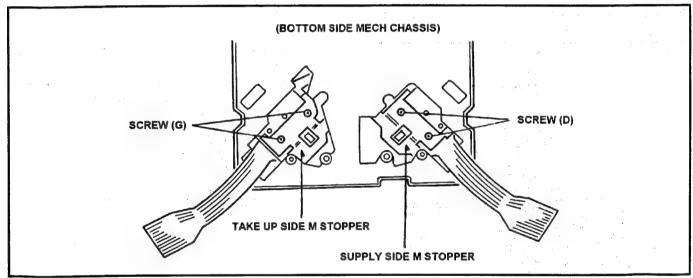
Removal of Supply & Take Reel Rotor Unit
